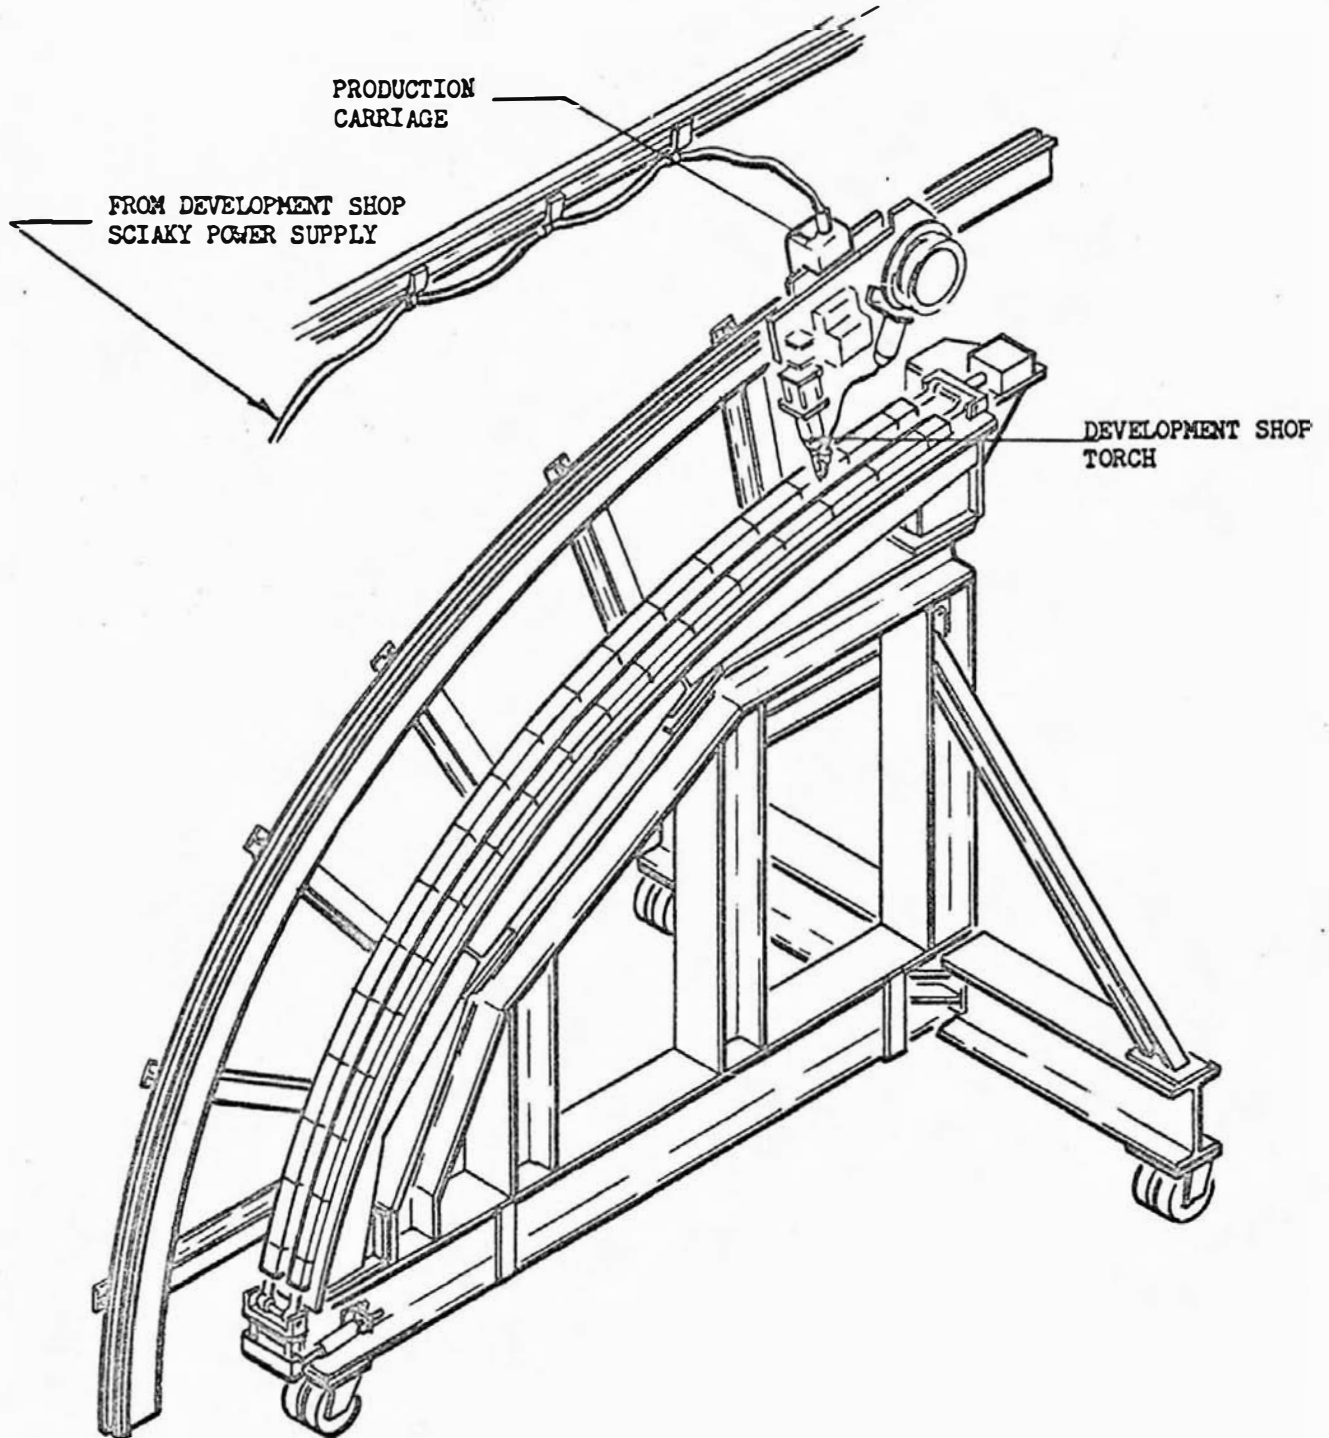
Apex-to-Base Development Weld Fixture
